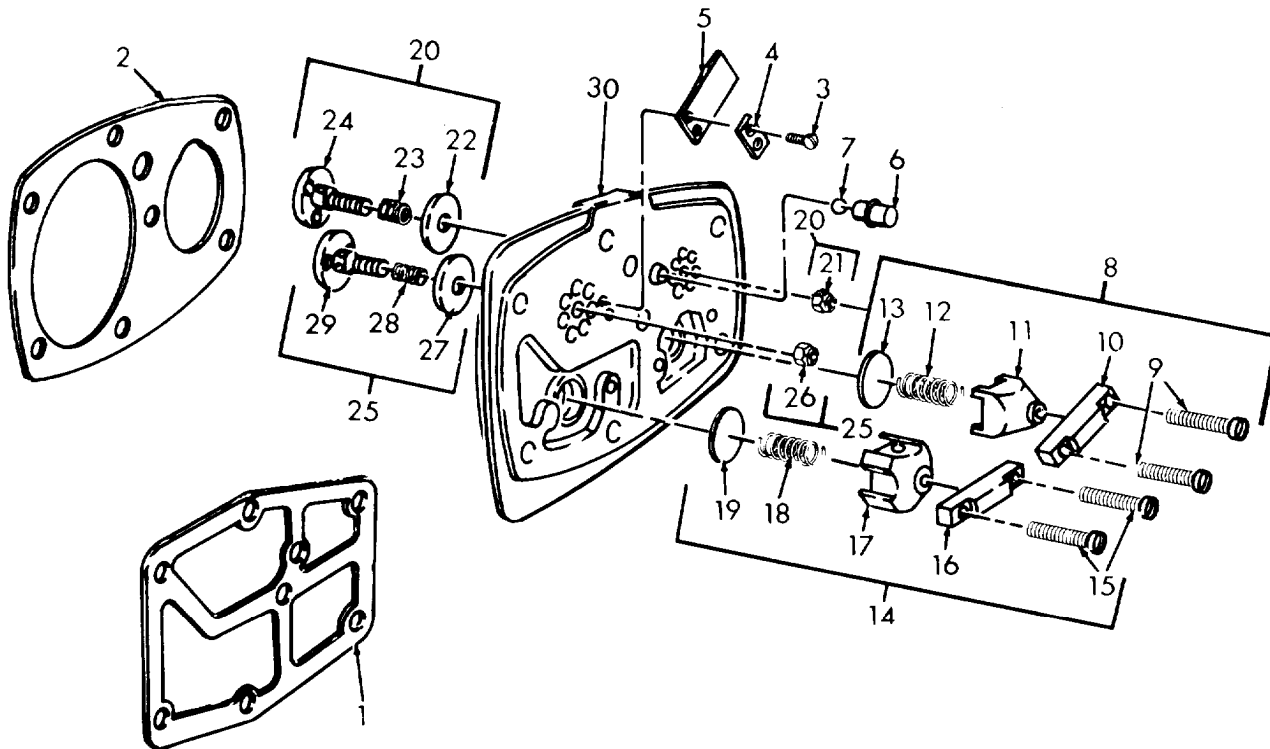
Air compressor, disassembly and reassembly (sheet 1 of 4).
